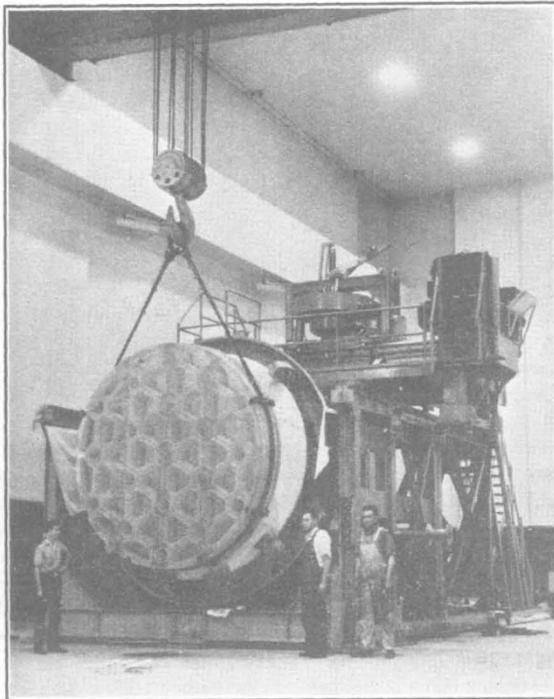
120-INCH MIRROR DISK BEING PLACED ON GRINDING MACHINE.
